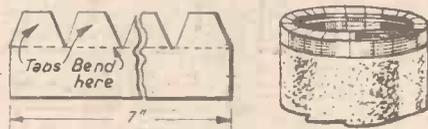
How the paper is cut to hold the disc in position. Fig. 4.—The flat ring of card placed on one end of the cylinder.
